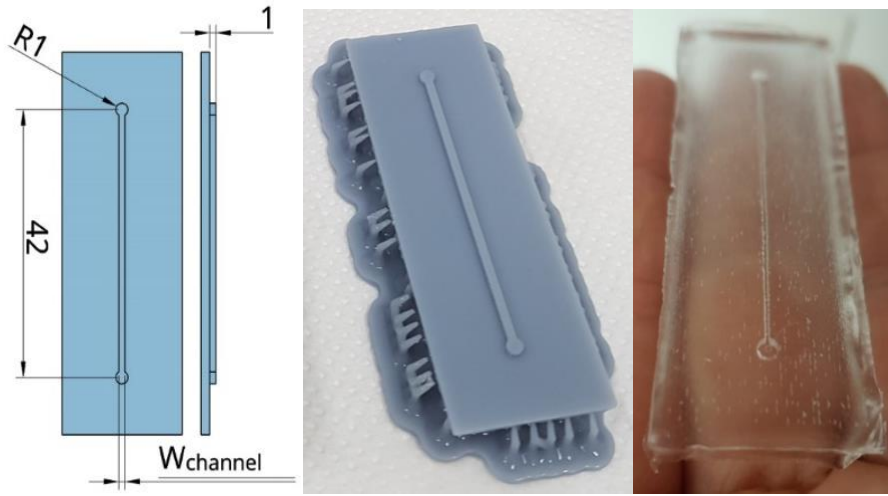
A. Drawing of the prototype mold (dimensions in mm); B. 3D printed mold; C. PDMS single channel prototype
